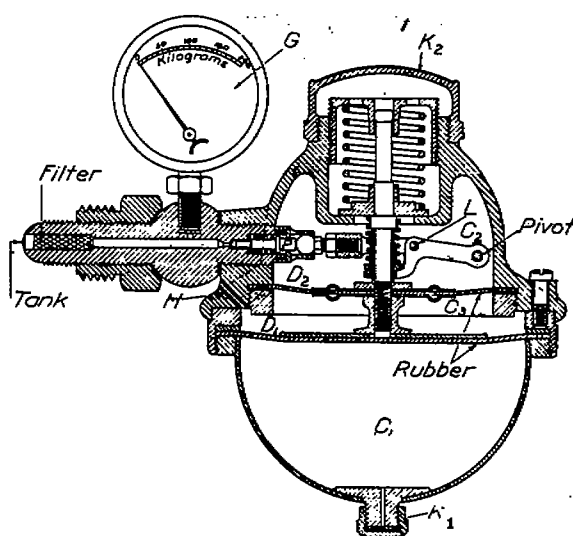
Garsaux Oxygen Apparatus, Improved Type.
